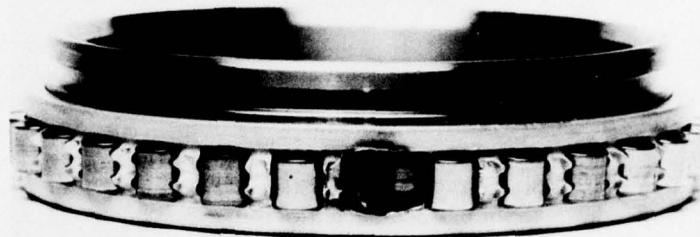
Typical Bearing Failure Attributable to Eccentric Roller End Wear
